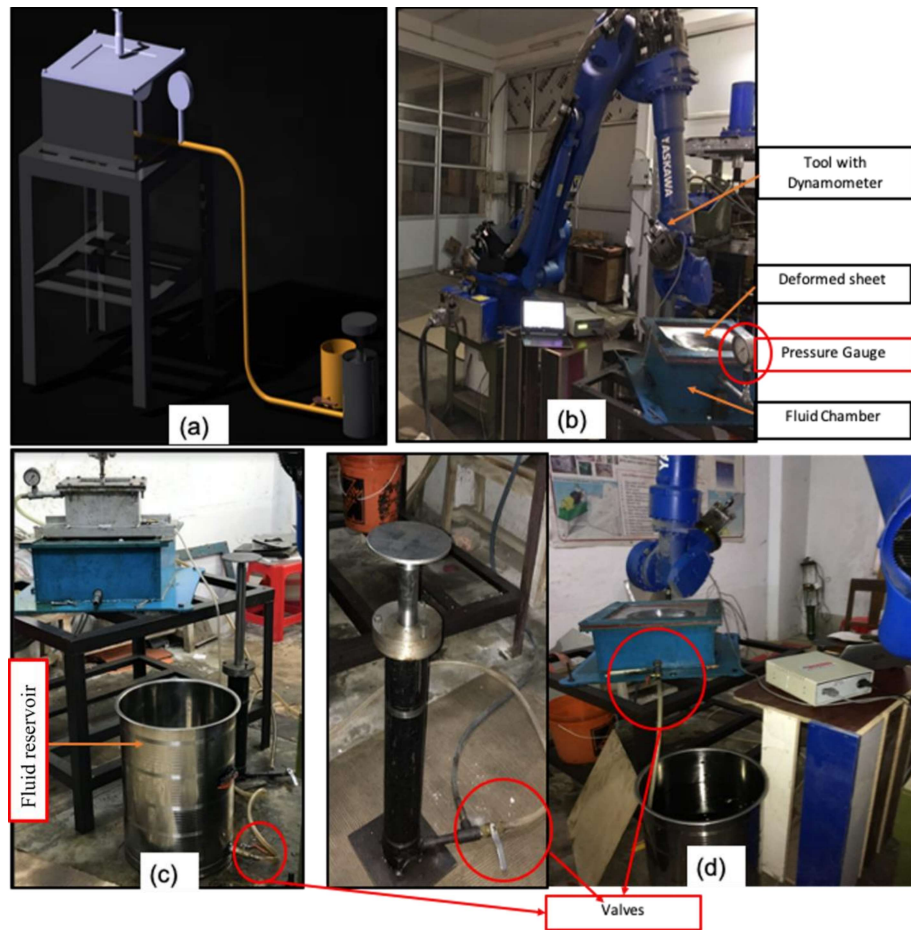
Complete fixture of RAISF and RAISHF (a) CAD model of RASIHf (b) established setup at IITBHU, (c) fluid reservoir, and (d) piston assembly with valves and fluid filled chamber
